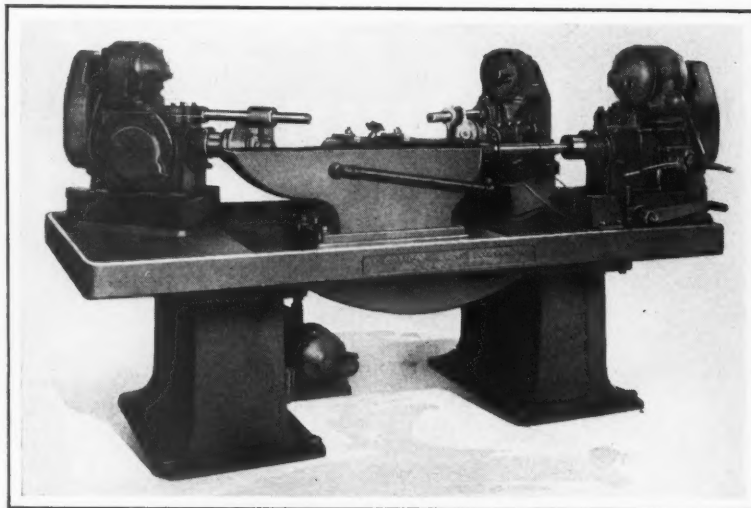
Semi-automatic Three-head Machine for Drilling Oil and Connecting Holes in Crankshafts
